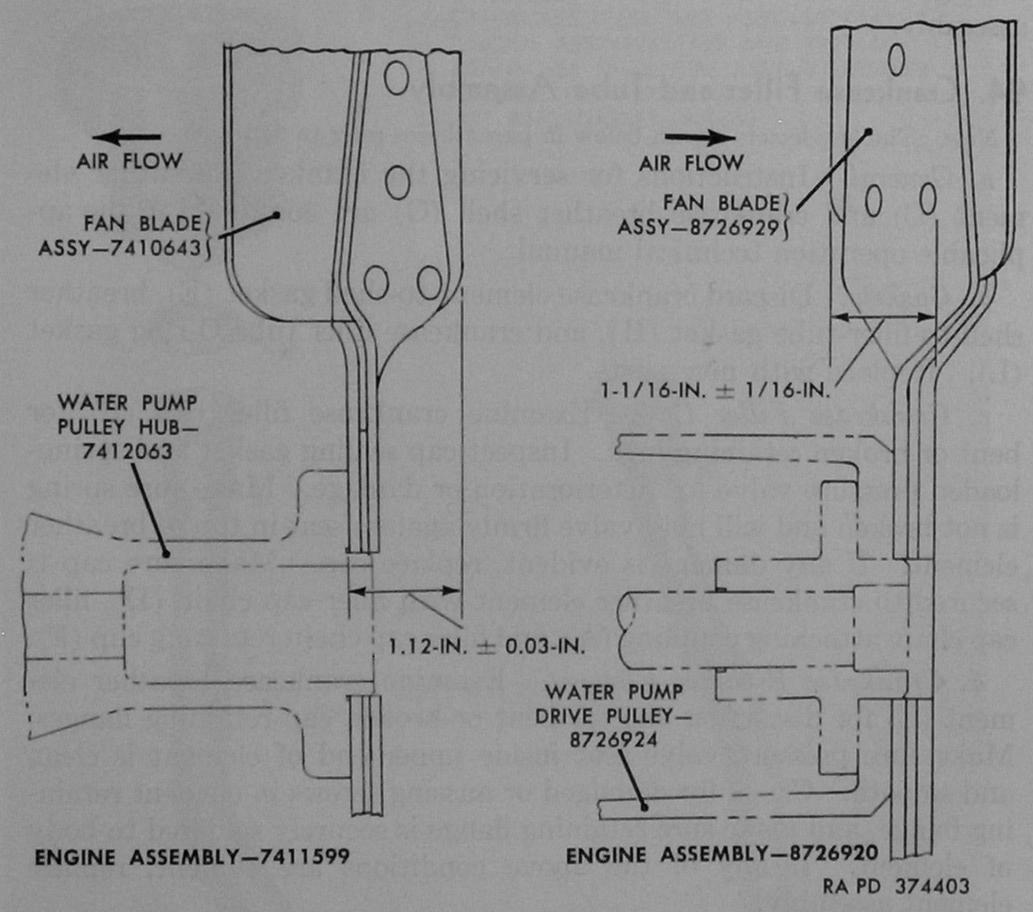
Fan blade alinement dimensions—engine assemblies 7411599 and 8726920.
